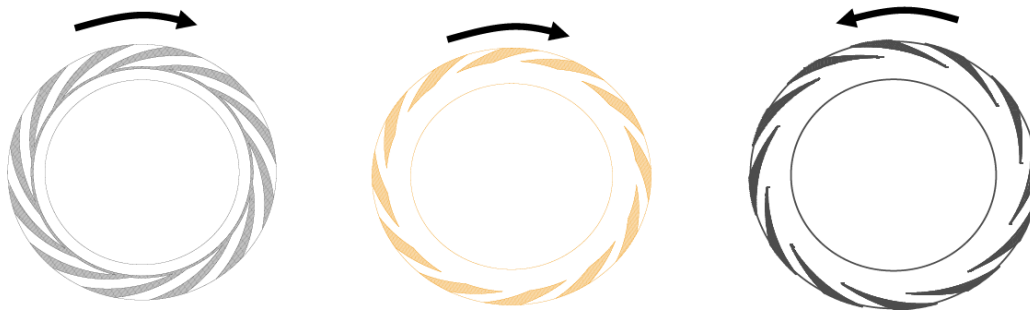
Drawing of Groove Patterns of Unidirectional Seal Designs [2]
